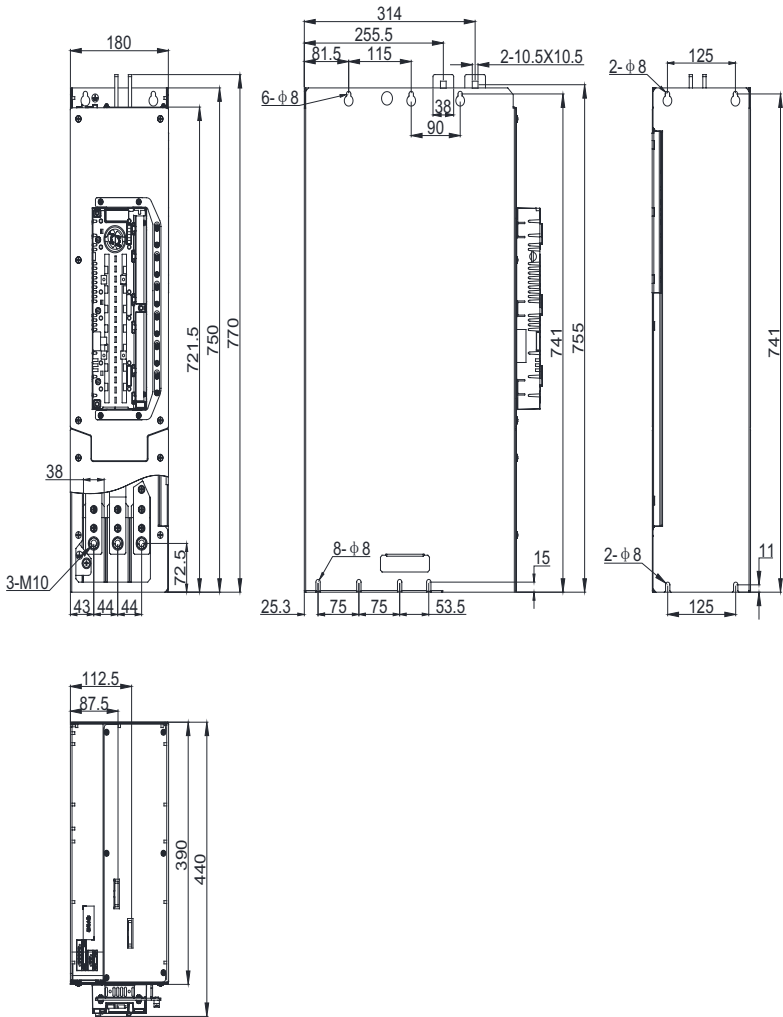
Outline dimensions of H6 DC choppers (mm)
